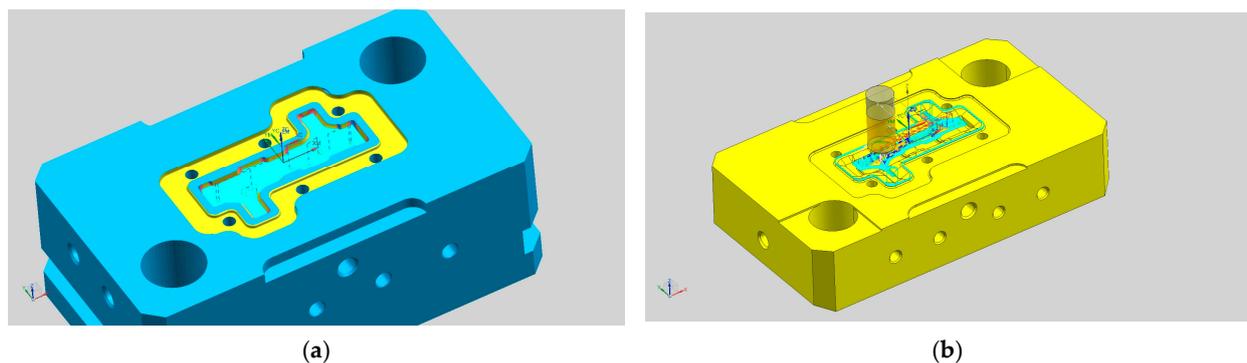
CNC machining before DED process: cavity milling (a) and border milling (b).
